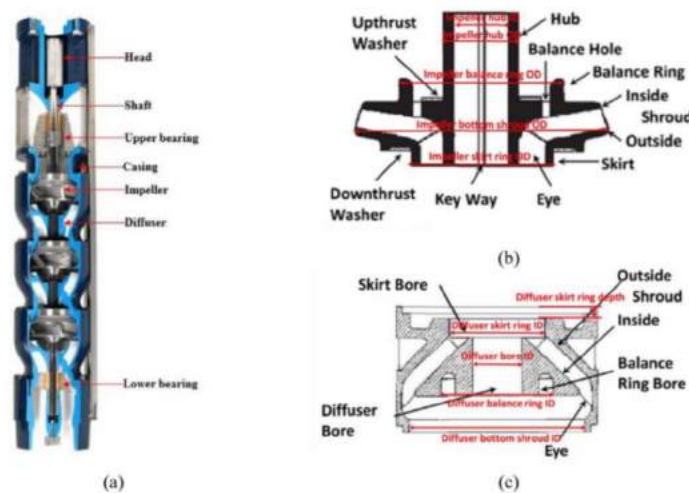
Components of ESP, (a) entire ESP, (b) impeller front view, (c) diffuser front view
